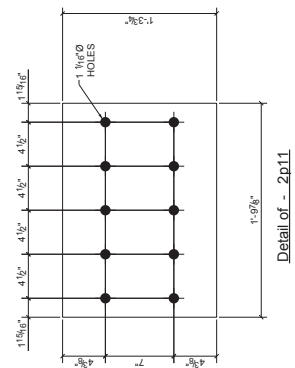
Fabrication Drawing, Girder Reaction Frame, Right Column
